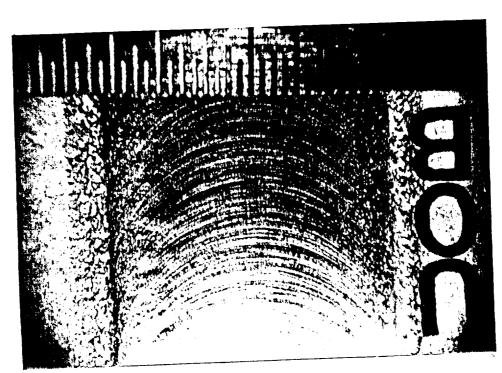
D Weld made with 25 ppm Hydrogen in shield. Keyhole. Back.
